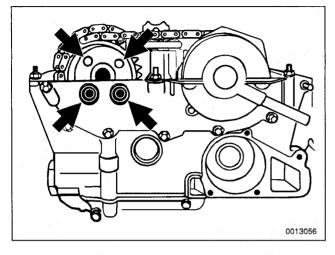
Exhaust camshaft mounting bolts (arrows).
